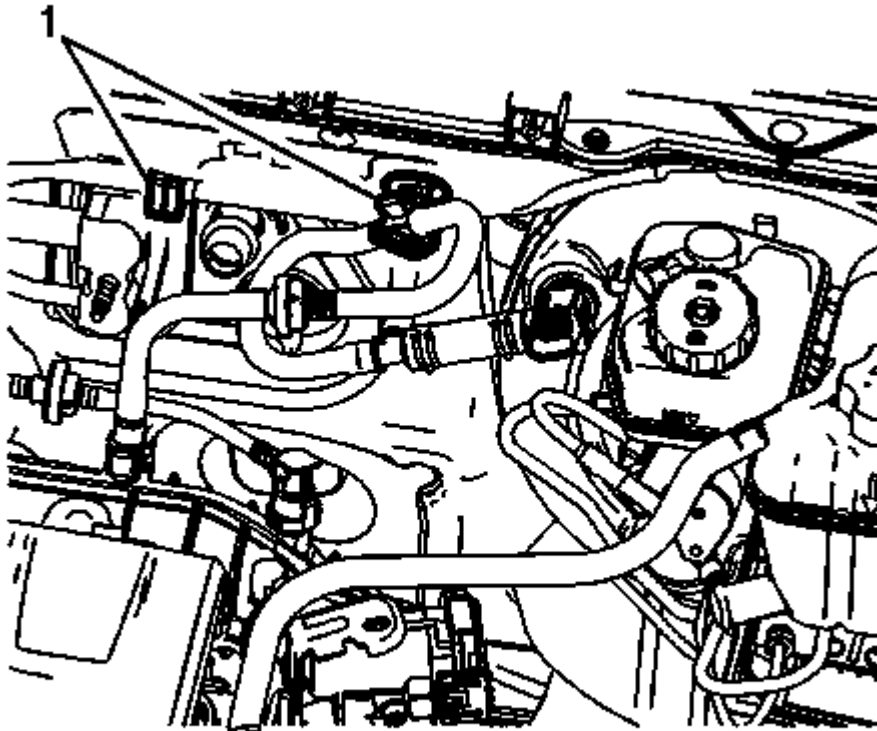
Power Brake Booster Vacuum Rear Pipe
